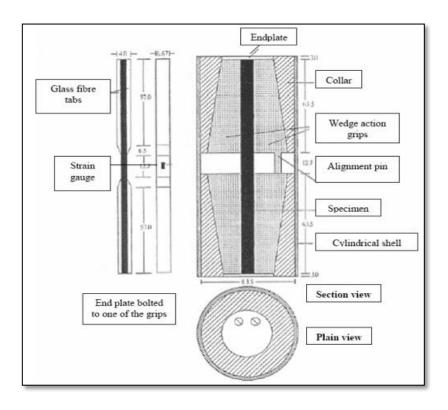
Celanese compressive fixture and specimen (all dimensions in mm) (Mechanical Testing of Composites, 2012)
